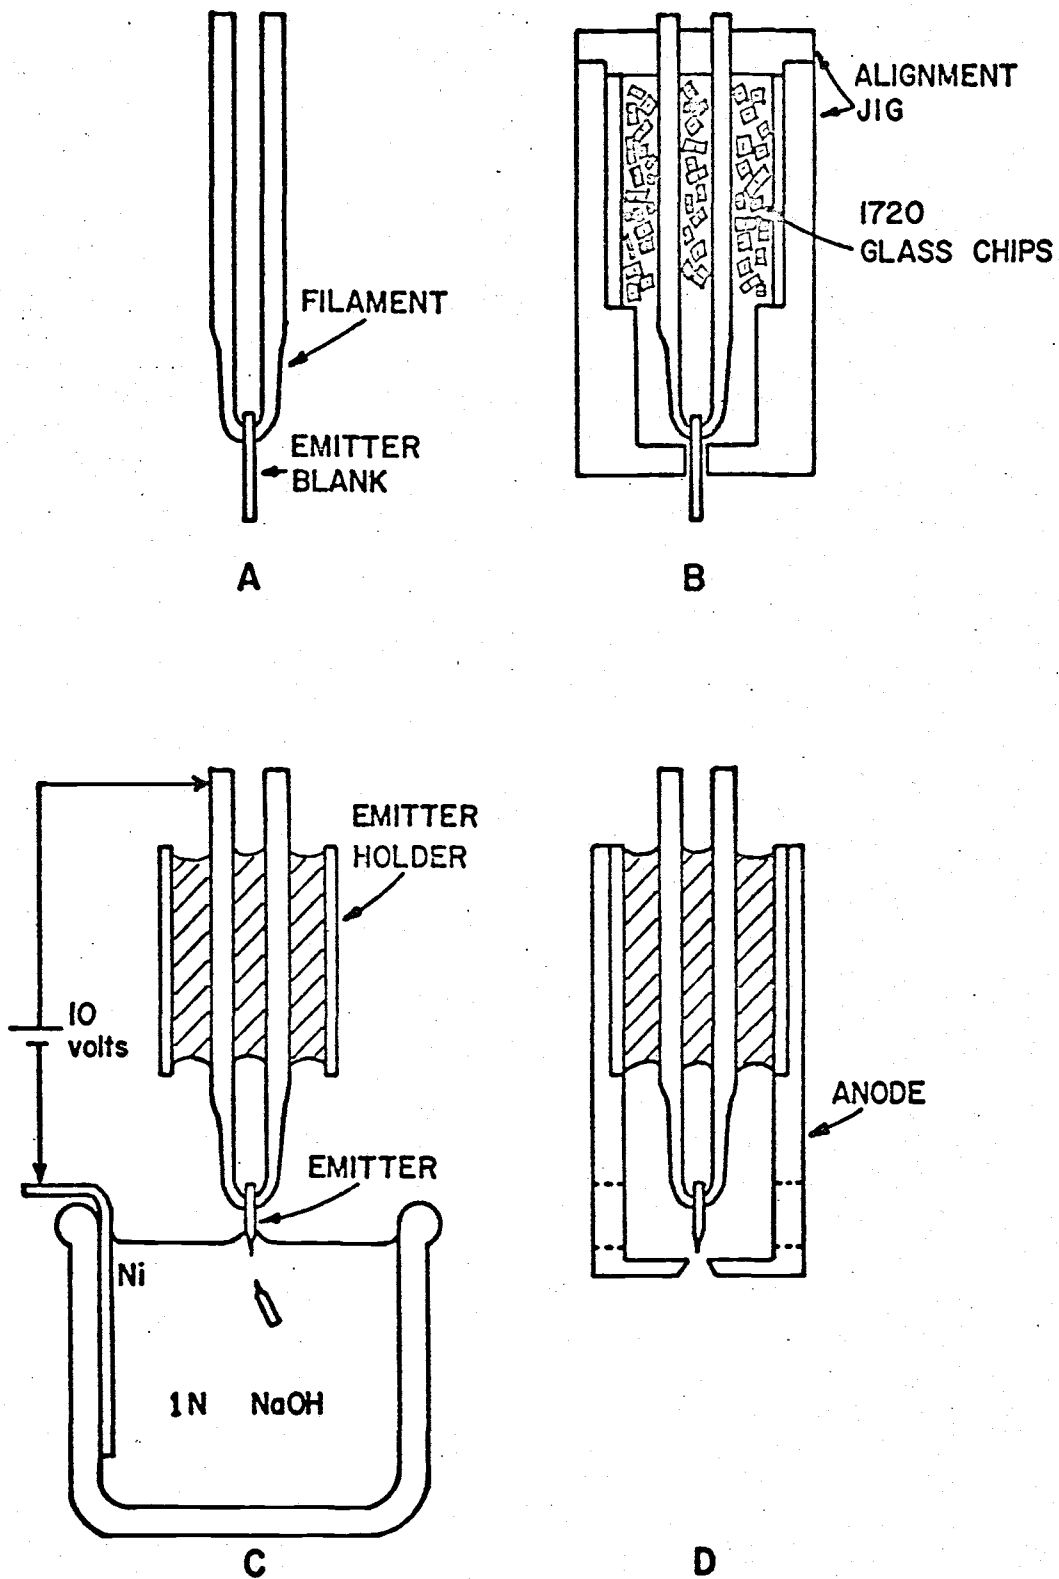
Emitter fabrication: A. Emitter blank spot welded to filament; B. Emitter blank and emitter holder in alignment jig; C. Emitter etching arrangement; D. Emitter-anode assembly.
